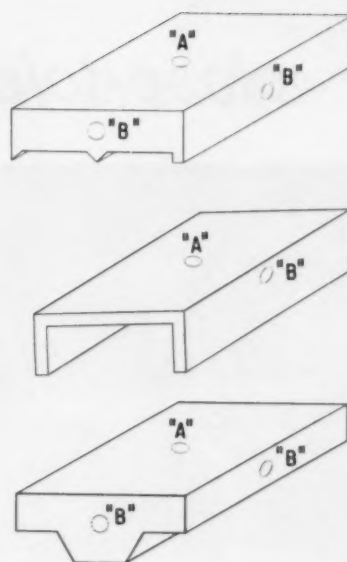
Three types of foam part designs, all having one flat surface (shown uppermost in the drawings) which allow the molds to be loaded manually in the open position in vertical-acting presses. Pre-expanded beads are then simply poured into the cavity and distributed so that they are level with the flat surface of the mold lands. Molds may also be loaded in the closed position; filling locations are indicated by "A" and "B" as explained in the text of this article.
